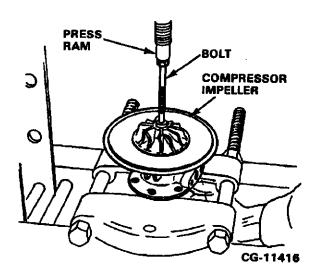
Separating Compressor Impeller from Turbine Shaft
